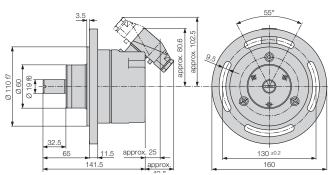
KINAX WT 707 with plug-in connector and flange.
